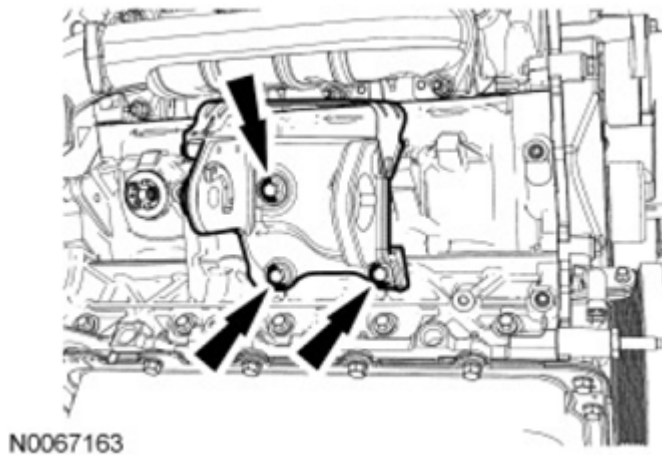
Locating RH Engine Support Insulator Bracket And Bolts
